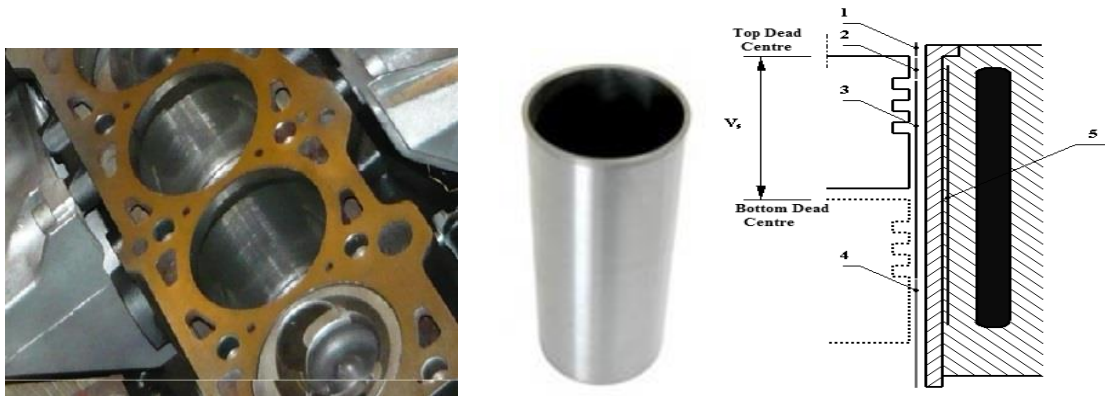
View of engine cylinder with its characteristic surfaces: 1- cylinder bearing surface from the side of engine combustion chamber, 2- cylinder bearing surface from the side of piston head in TDC to first ring, 3- cylinder bearing surface from the first ring of piston in TDC to the third ring in BDC of piston, 4- cylinder bearing surface below the third ring in BDC of piston, 5- cylinder sleeve from the side of coolant
